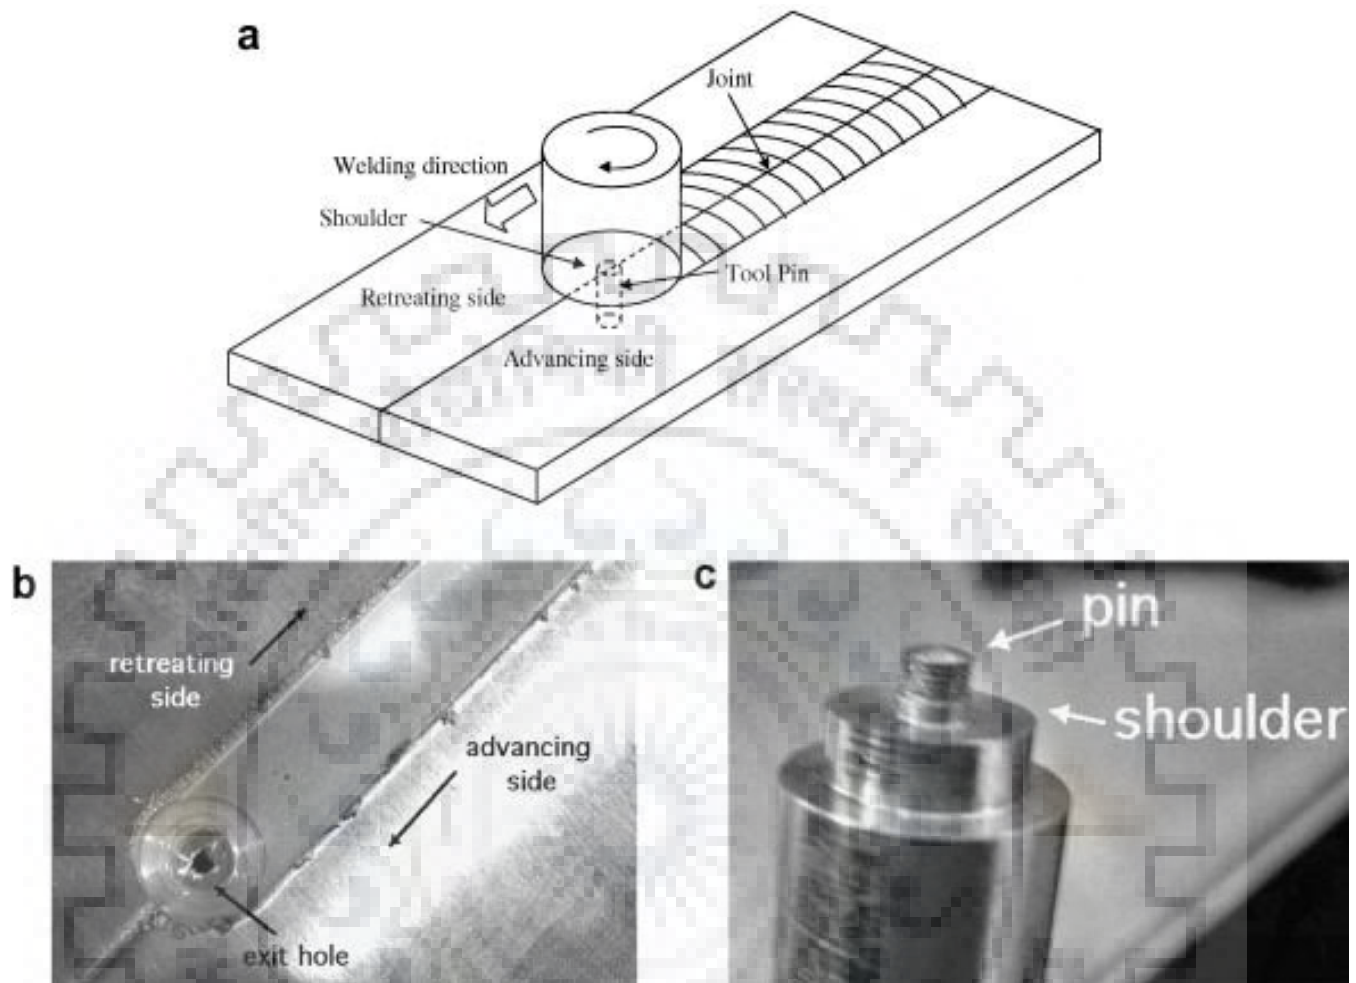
(a) FSW process. (b) After FSW between aluminium sheets. (c) FSW tool
